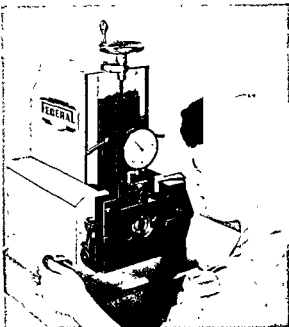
Indicating gage of the mechanical contact type being used to inspect a part. (Federal Products Corp.)
